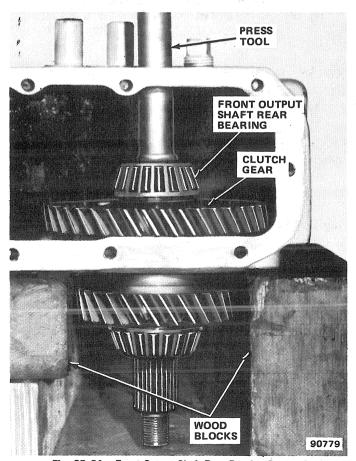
D-81 Front Output Shaft Rear Bearing Removal
